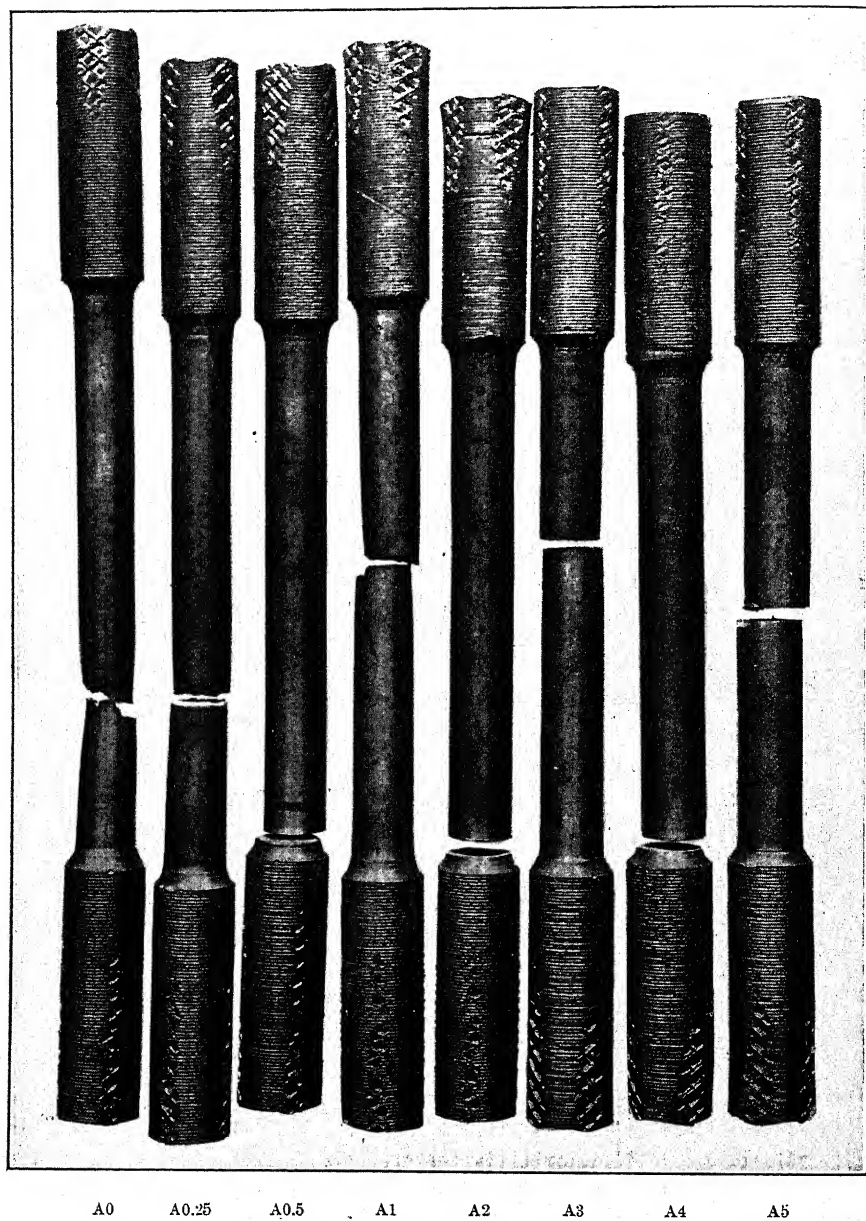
UNANNEALED TEST PIECES AFTER FRACTURE.
